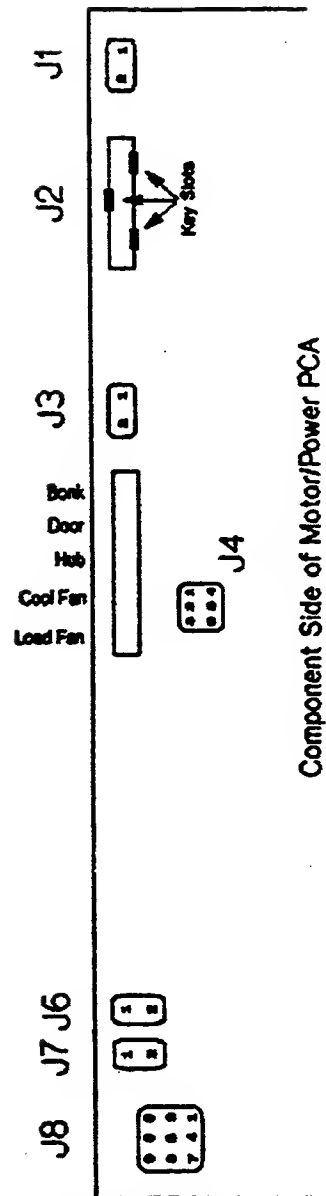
Motor/Power Pin Positions (07980-6xx05, 88780,6xx05)
